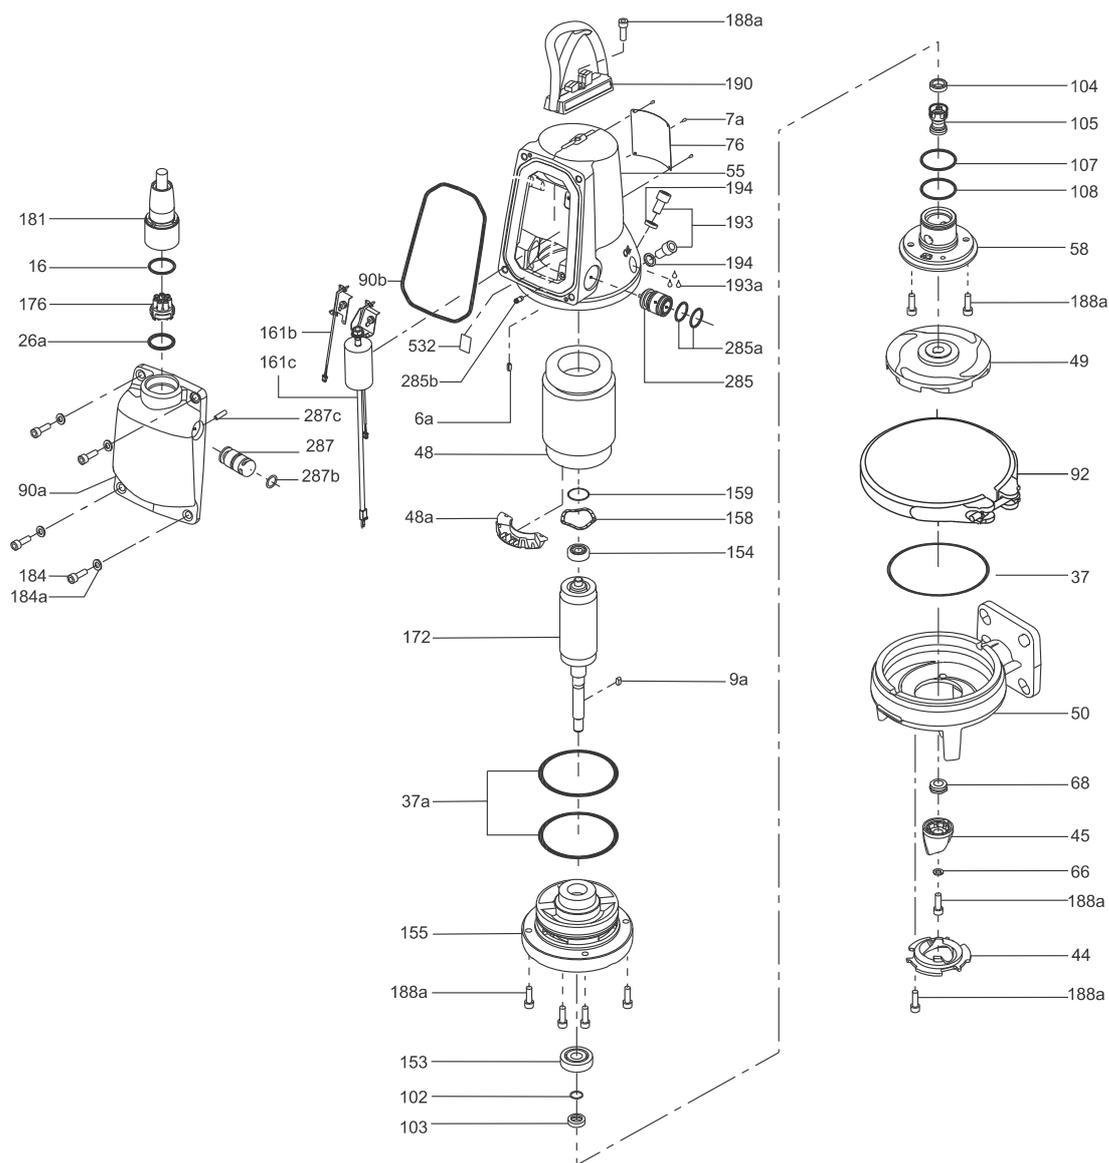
Exploded view of SEG AUTO_{ADAPT} pumps, 0.9, 1.2 and 1.5 kW
